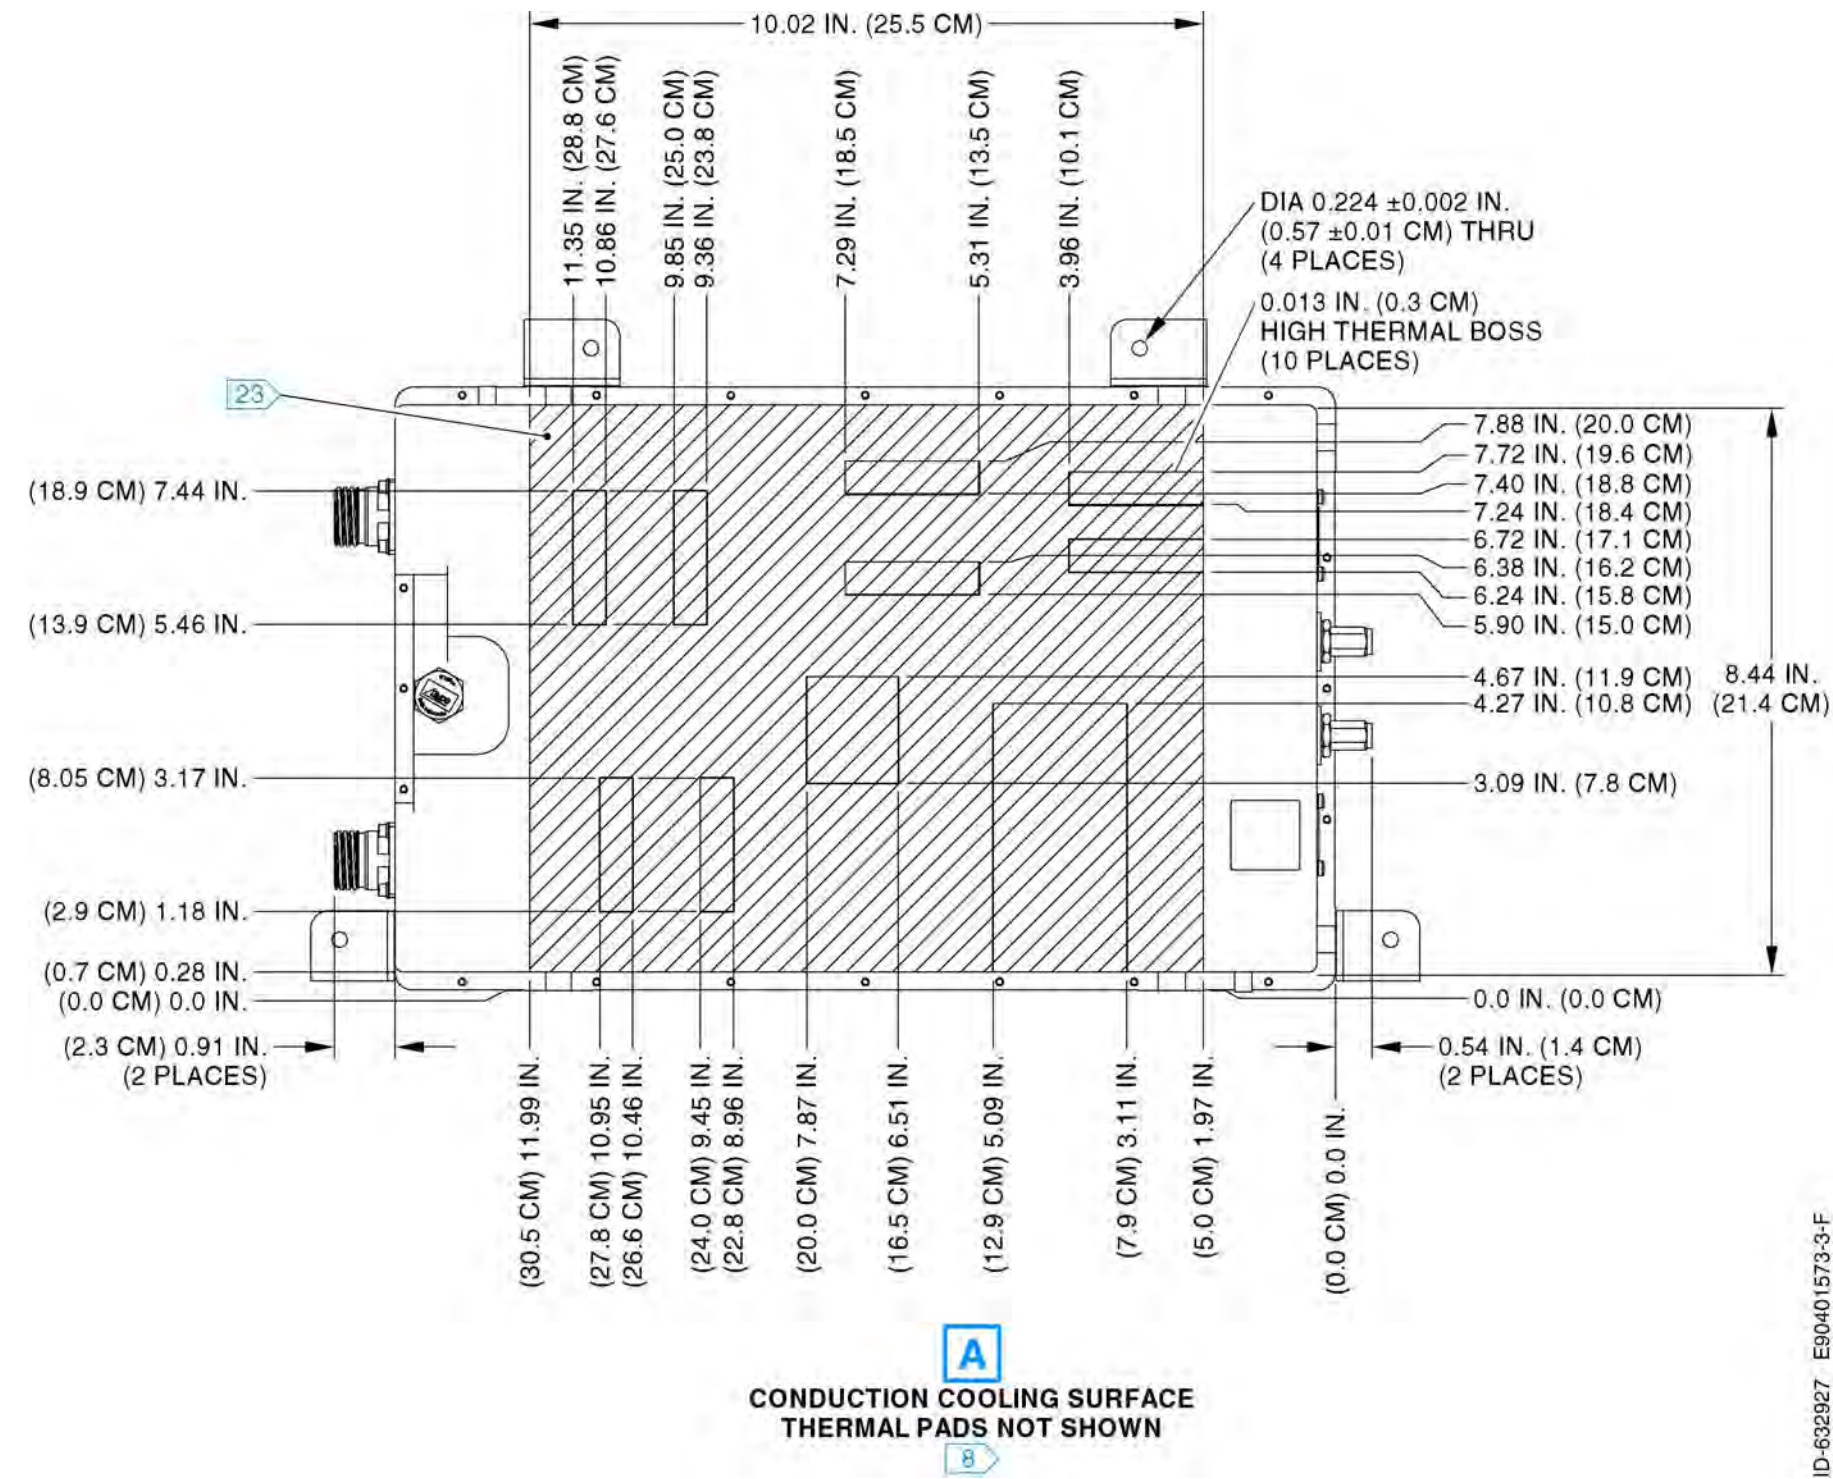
(Sheet 6 of 9) KRFU, Conduction-Cooled 1, Outline and Installation Drawing (90401573, REV F)
